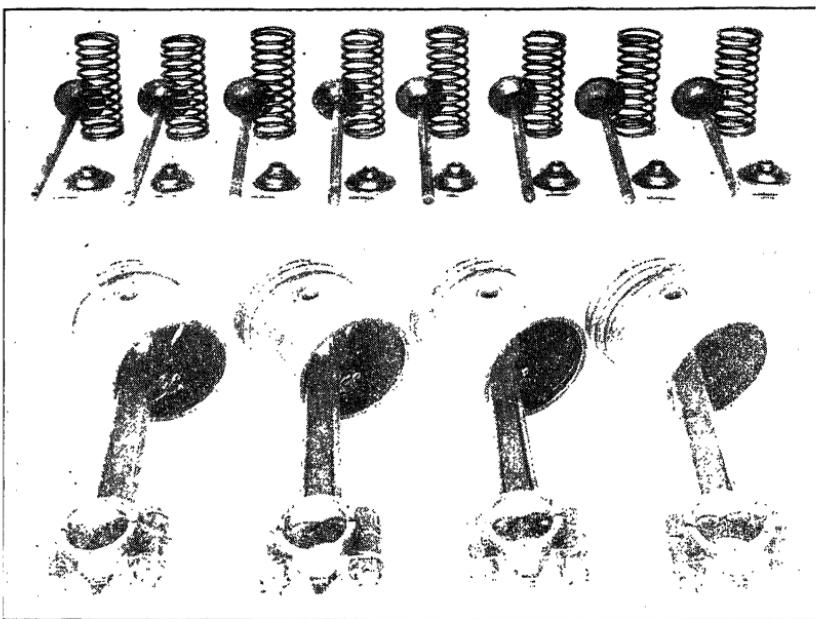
Clean Up the Engine Parts and Lay Them Out in Order for Inspection
